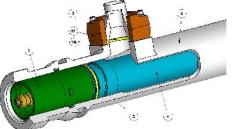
Schematic representation of the feeder coupling mounting at the end fitting
